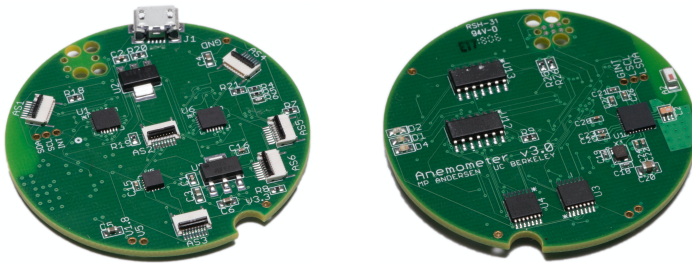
Final prototype 6-layer Hamilton board integrated with the anemometer carrier board.
